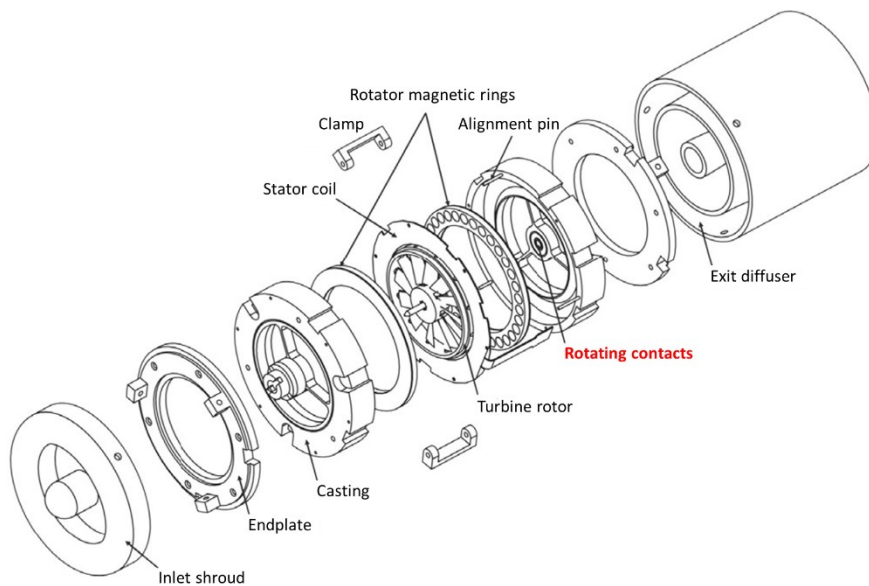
Exploded View of All the Parts of the Micro Energy Harvester [6]
